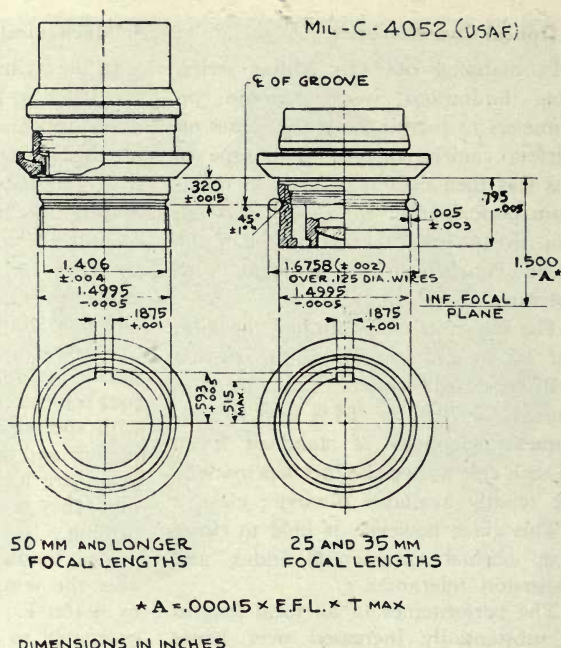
Lens and camera mounting dimensions from MIL Specification.
